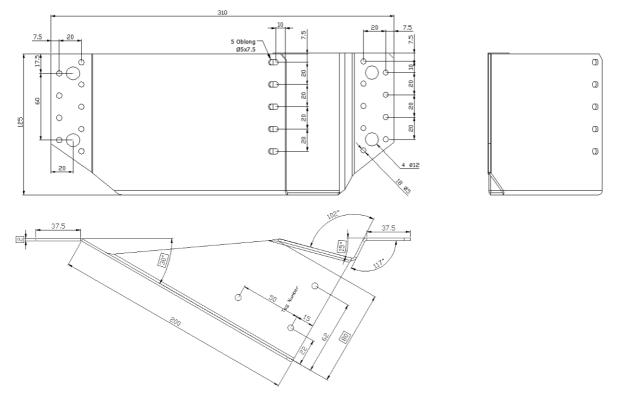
Dimensioned drawing of skewed hanger S1530D/80/2
